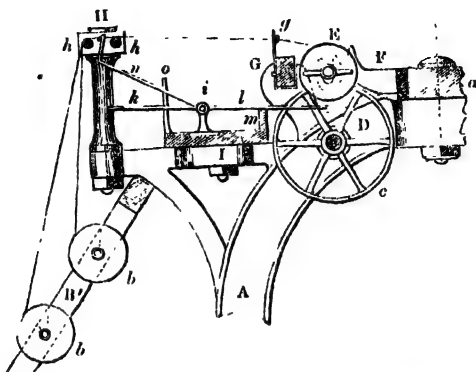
Mechanism of Silk Doubling-Mill.—Section.
